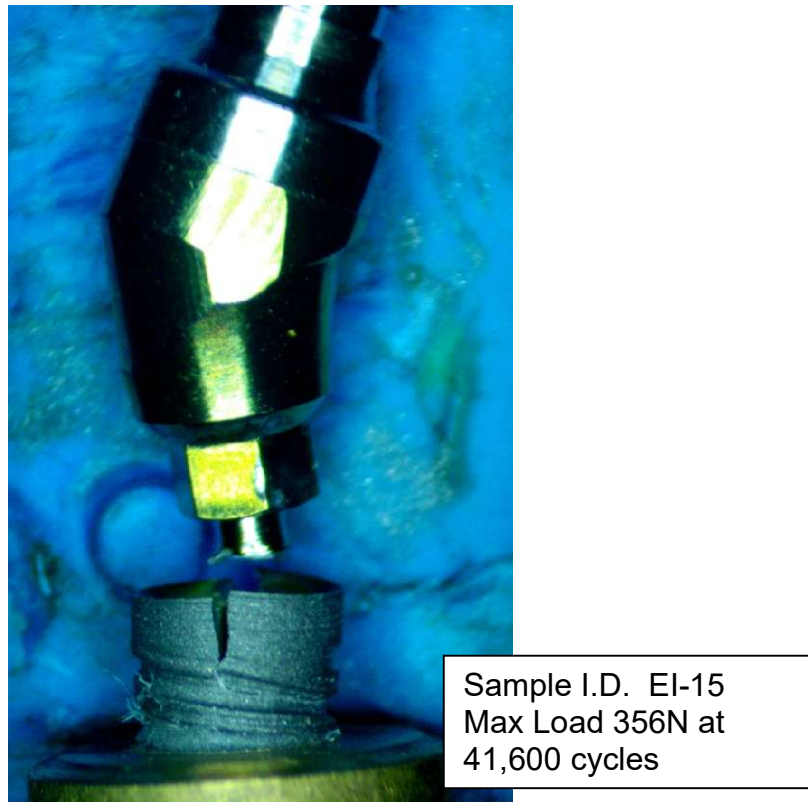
Fatigue Test Failure Mode - Vertical crack in implant collar & abutment screw failure
